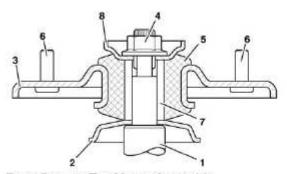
Front Spring Courtesy of BMW OF NORTH AMERICA, INC.
